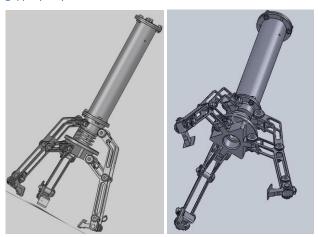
Cover for SMA and attachment of the gripper to the manipulator
